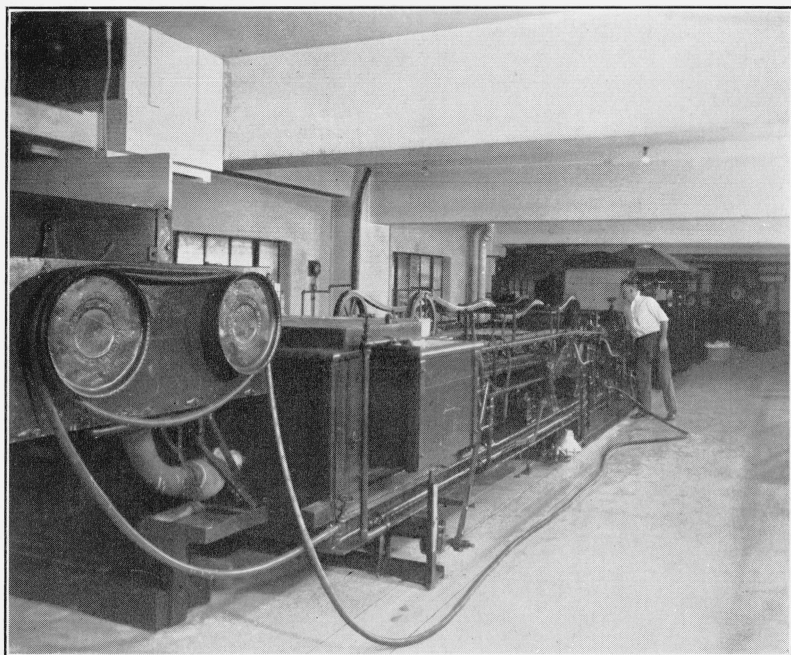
Fourdrinier machine viewed from wet end.
